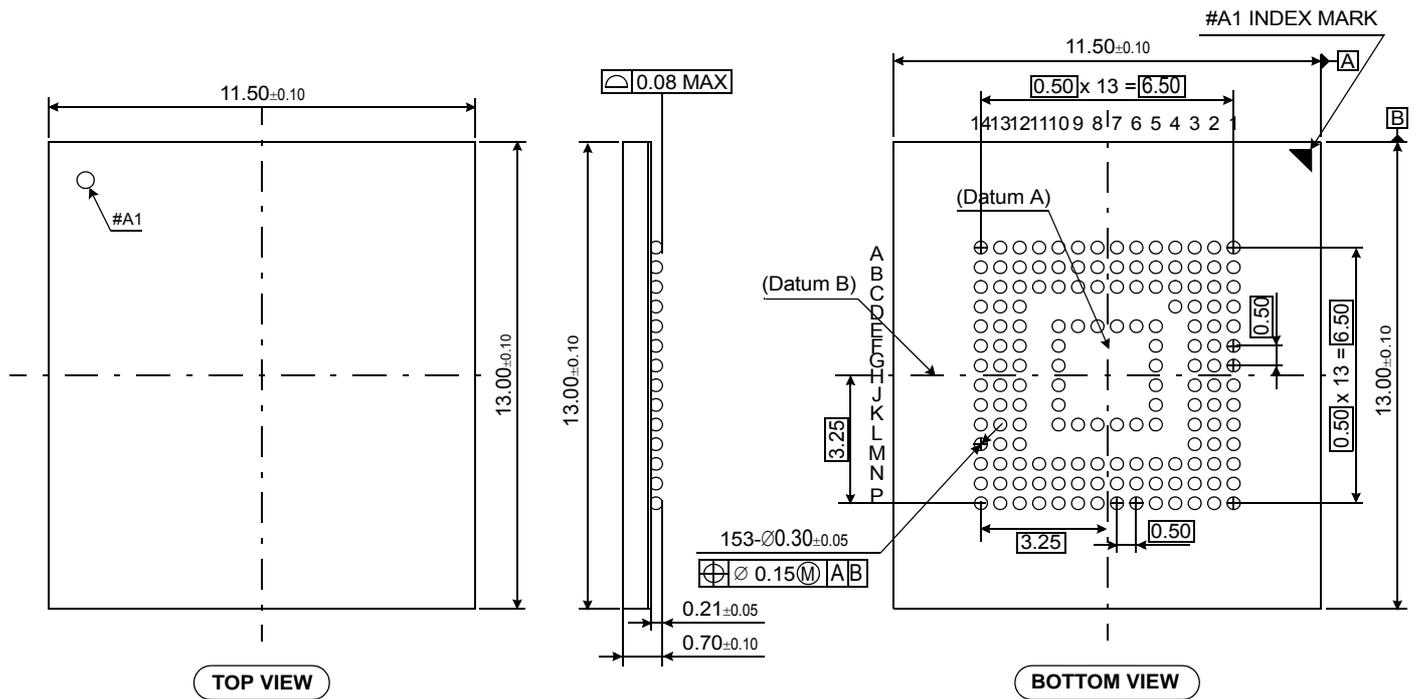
11.5mm x 13mm x 0.8mm Package Dimension
